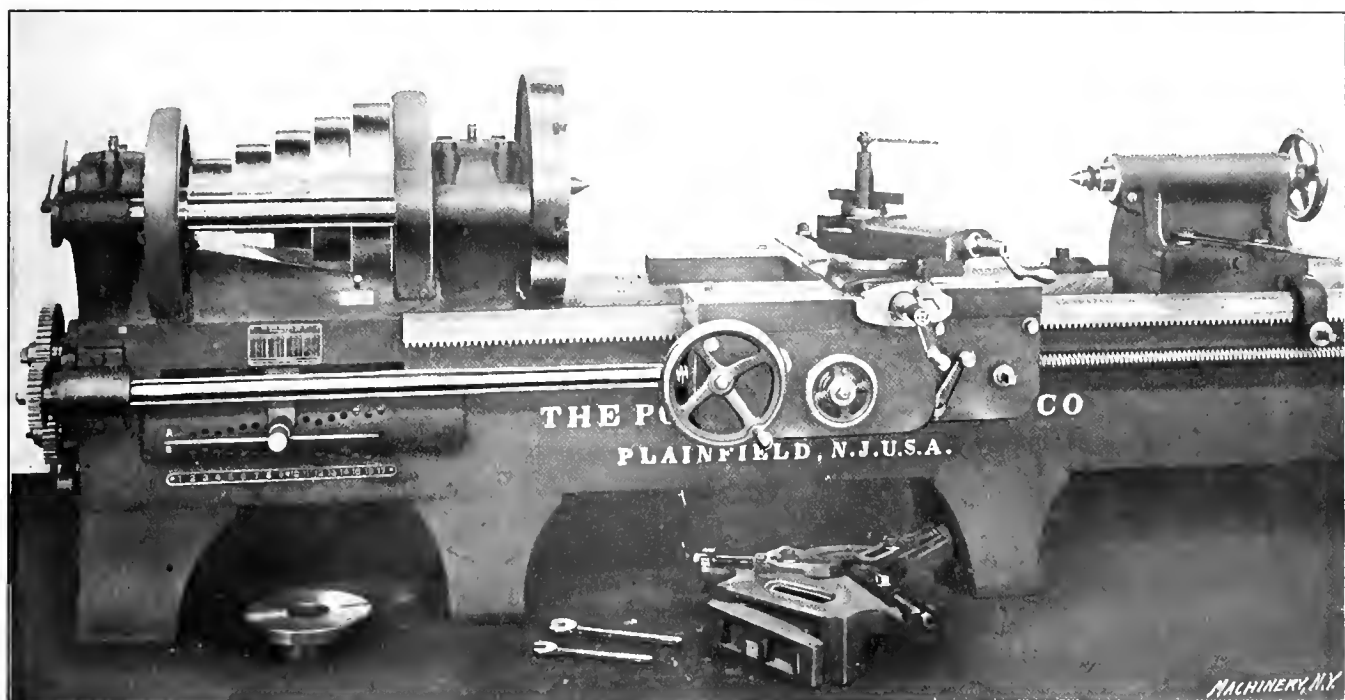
Twenty-four-inch Engine Lathe with Quick-change Gear Device
